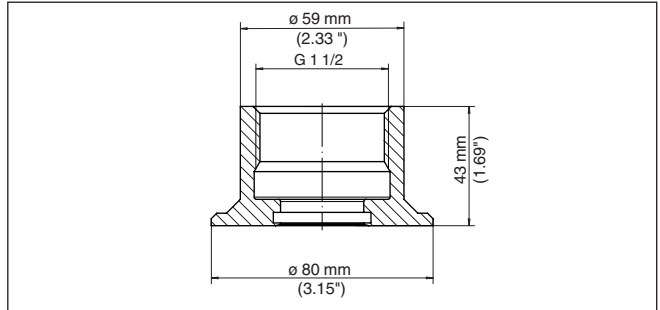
Dimensions of welded socket, G1½ (DIN 3852-A)
